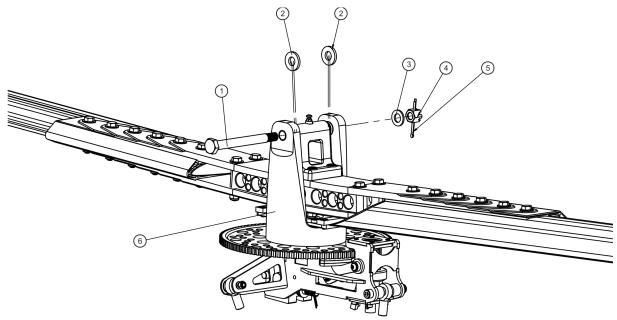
Installation rotor - teetering parts (Effectivity: RS II)
